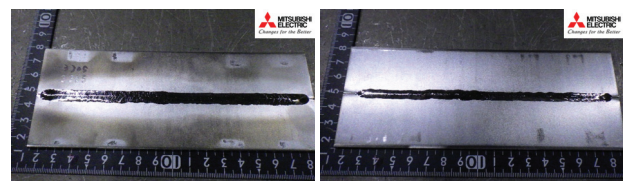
Example of the plain butt-welding result. [Left] Front side of the niobium test pieces. [Right] Reverse side of the niobium test pieces.
